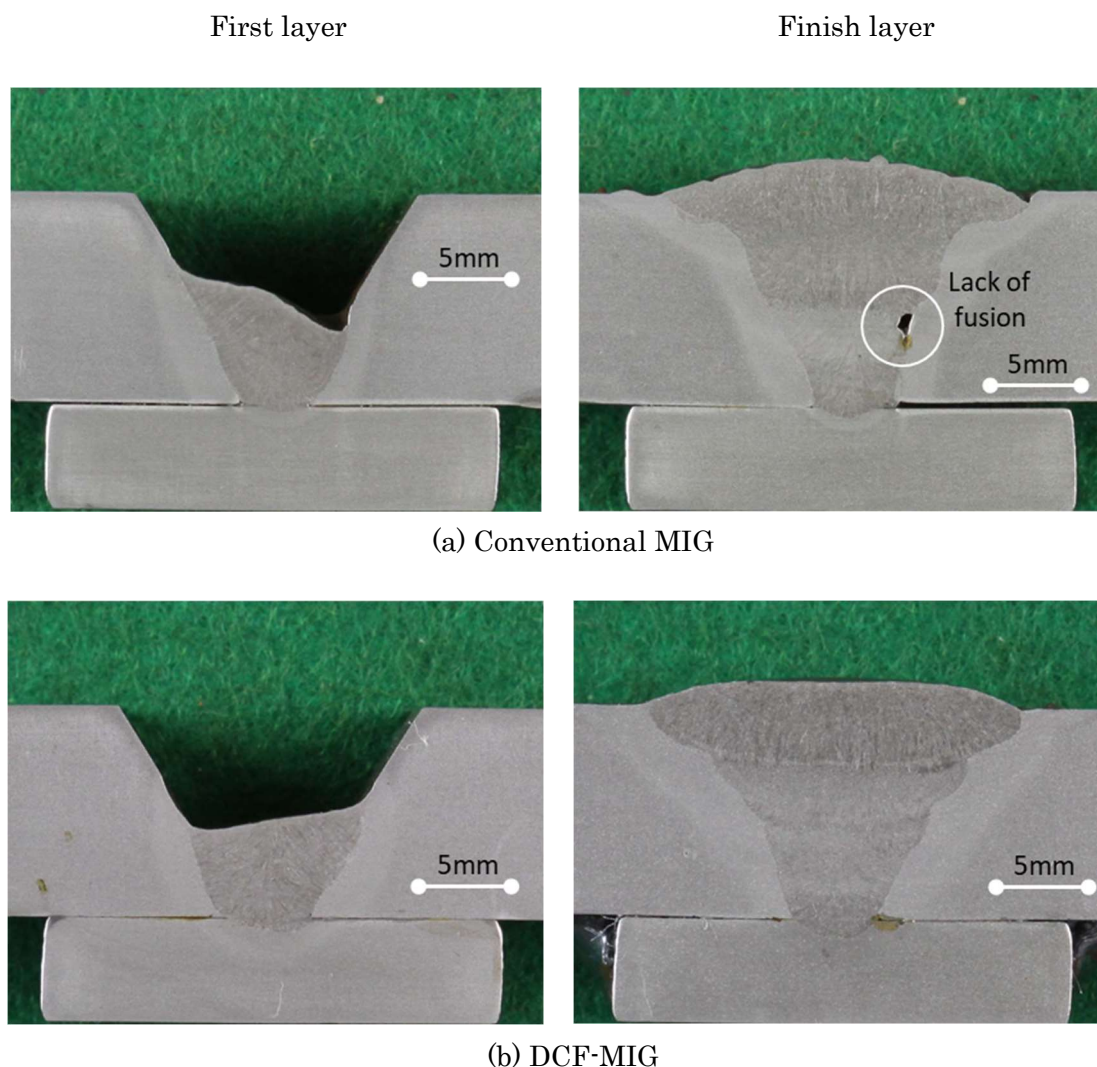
Bead cross section in multi-layer groove welding
